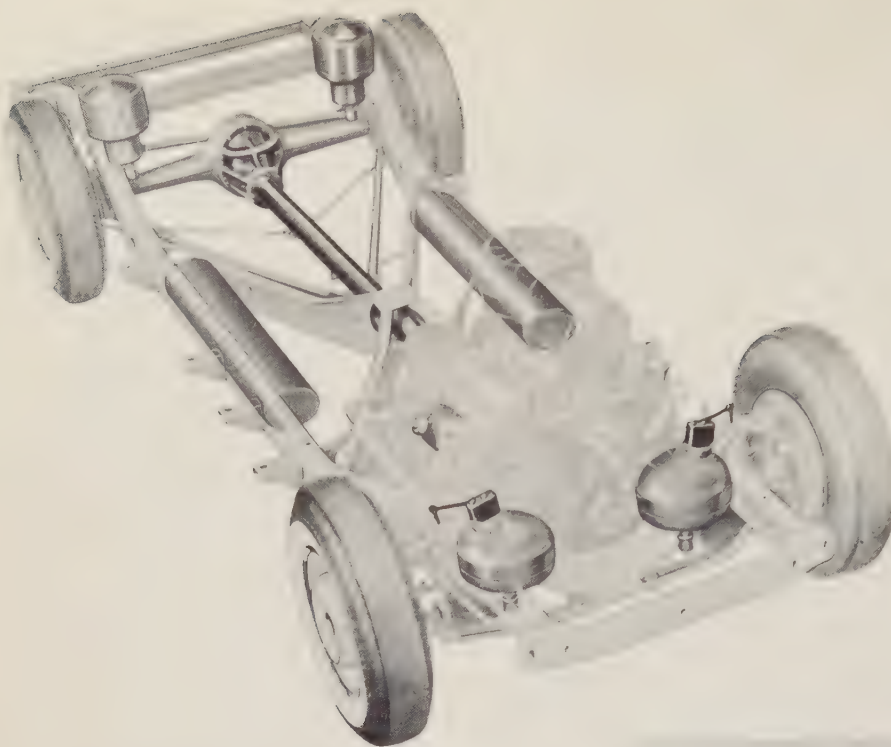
The individual air springs were tested on cars with two types of rear wheel suspensions. The air spring is readily adaptable to the torque tube drive chassis (above). A four-link type rear suspension is shown with air springs at the right. The air piston rods are attached directly to the axle. No major frame alterations are necessary when using either type of rear suspension.
